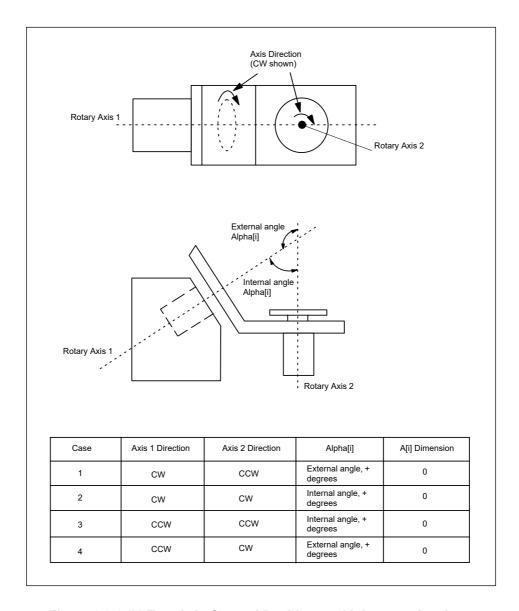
(b) Two-Axis General Positioner with Intersecting Axes
